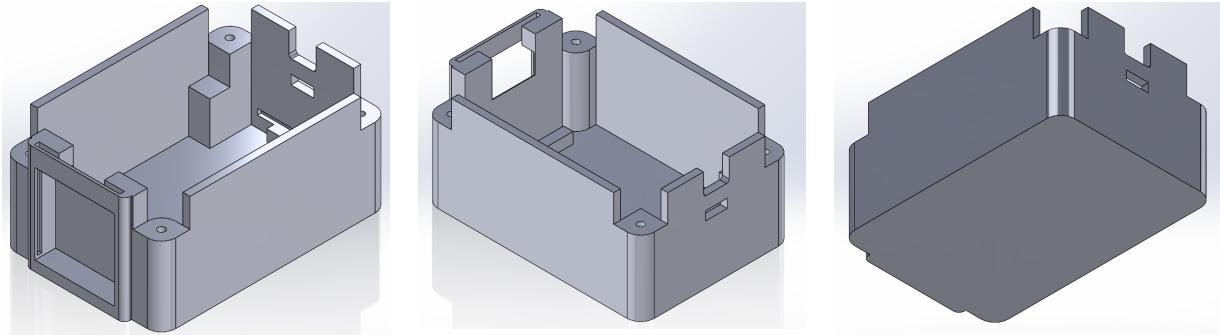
a) Front view of final housing b) Back view of final housing c) Bottom view of final housing
